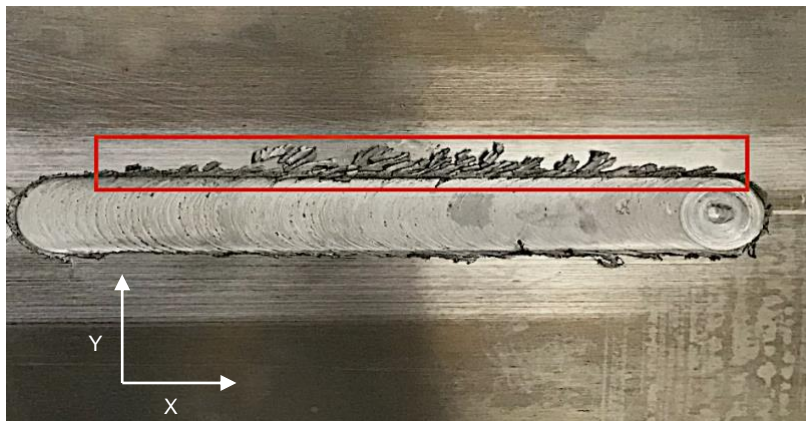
D5 weld, with its excessive flash highlighted.
